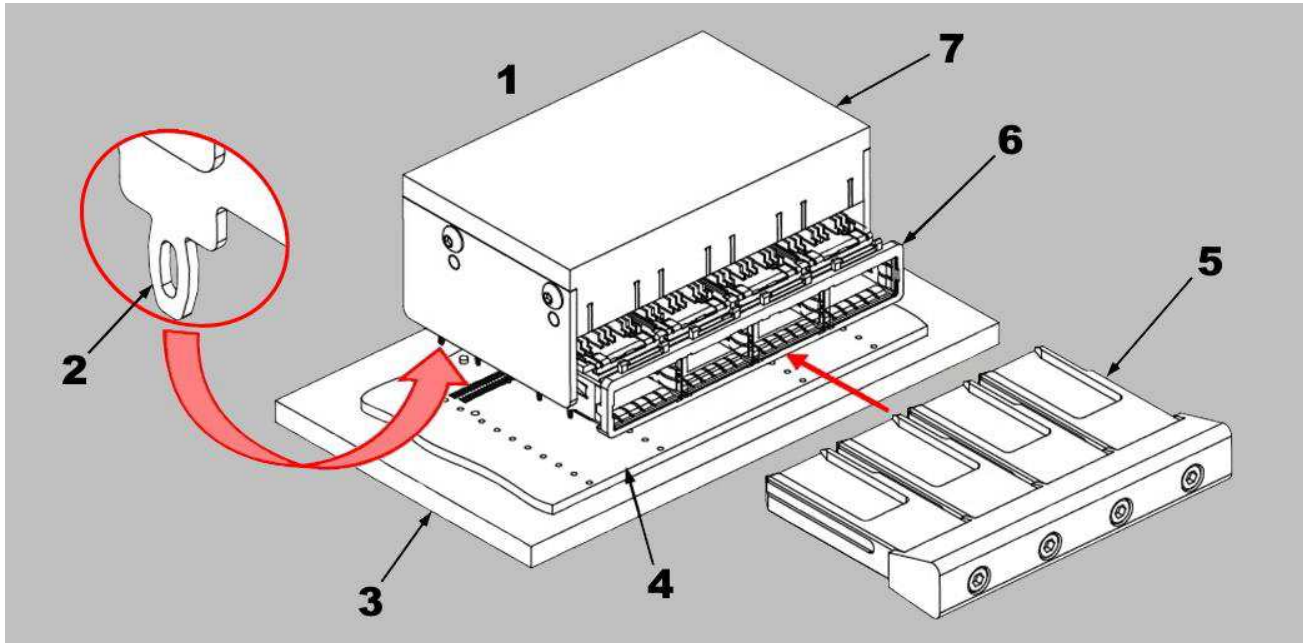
zSFP+ Cage Assembly Seating Tool 2185256-[]
